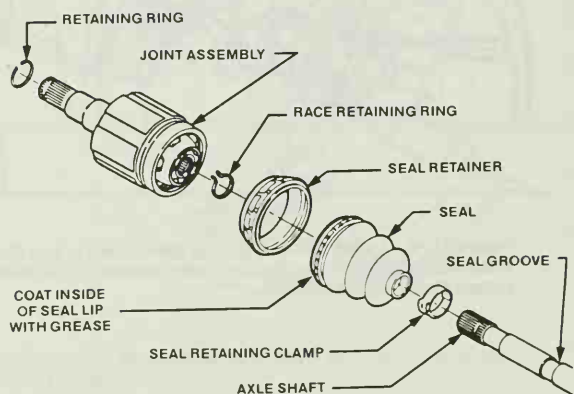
Parts of the inboard joint. (Chevrolet Motor Division of General Motors Corporation)
